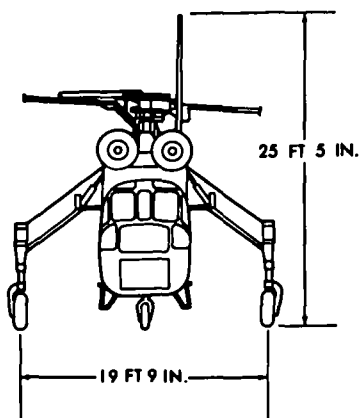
Principal Dimensions, CH-54A (Tarhe)
